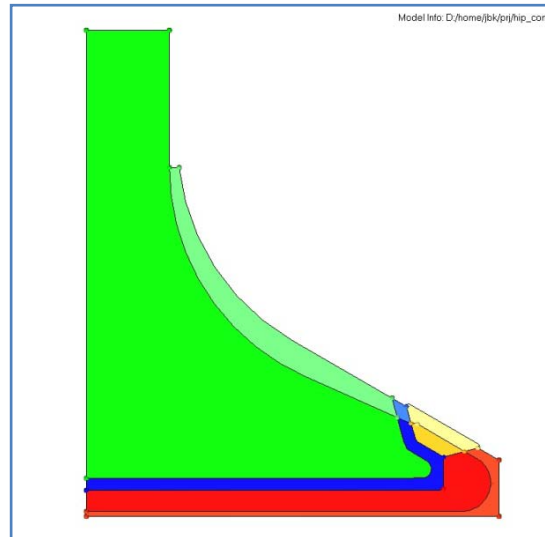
Prototype geometry: green = valve steel, blue = buffer layer, yellow = seat material and red = corrosion resistant material
